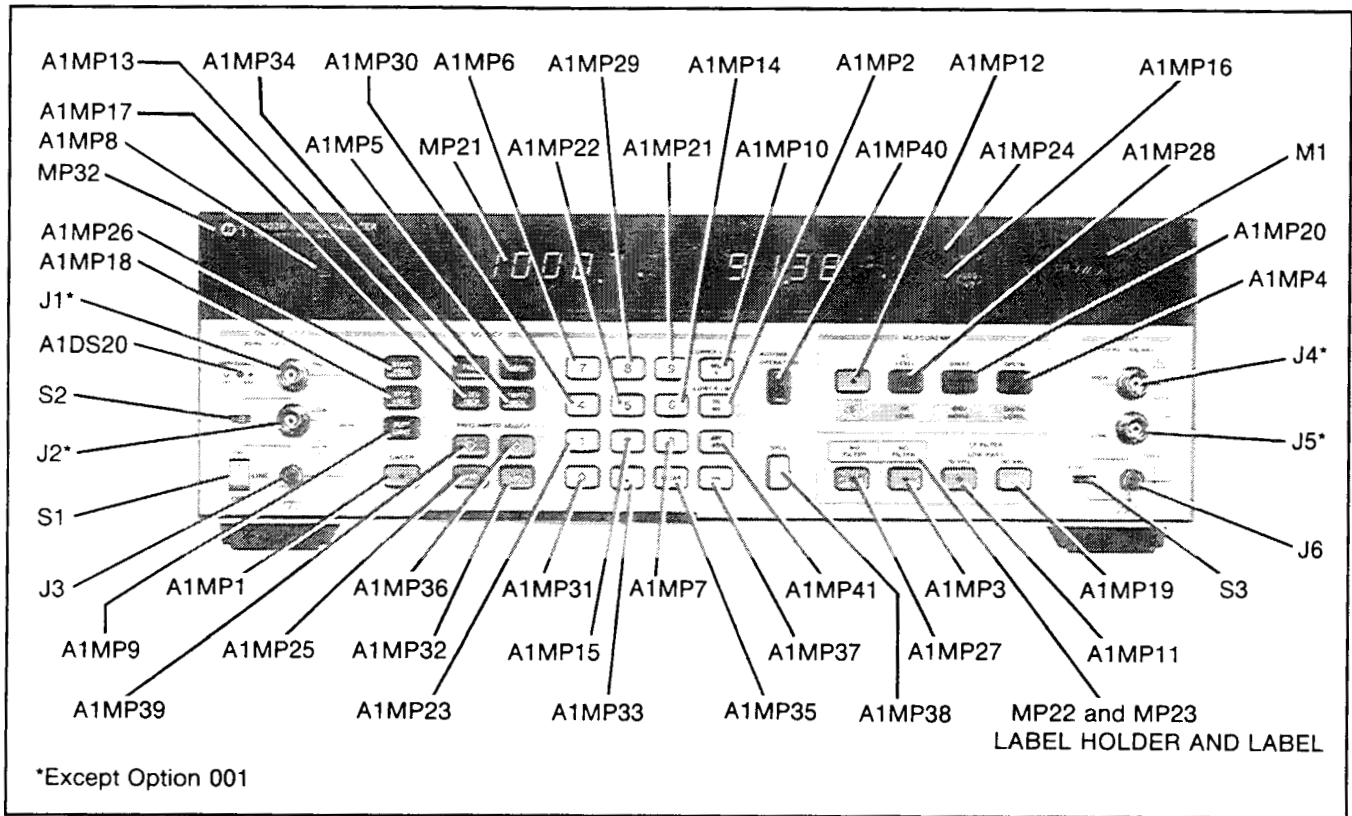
Chassis and Mechanical Parts Identification - Front Panel
